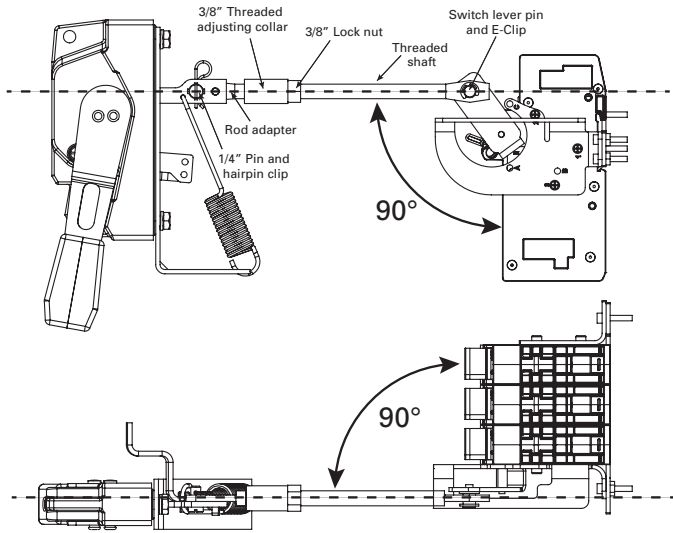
For proper alignment, position switch and operator assembly against panel back wall so that the threaded shaft is at right angles vertically and horizontally.
